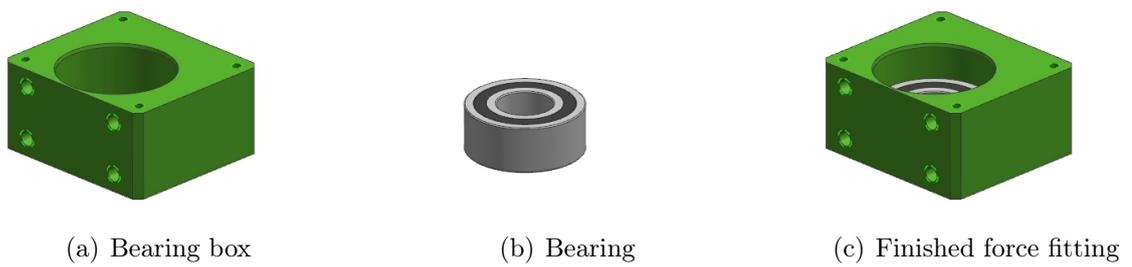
Task "Prepare assemble-aid-tray for force fitting"
